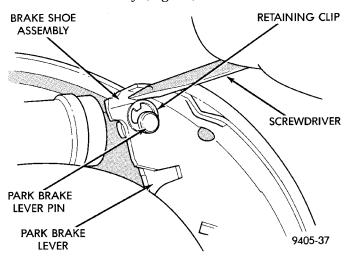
Park Brake Lever Pin Retaining Clip Installation
